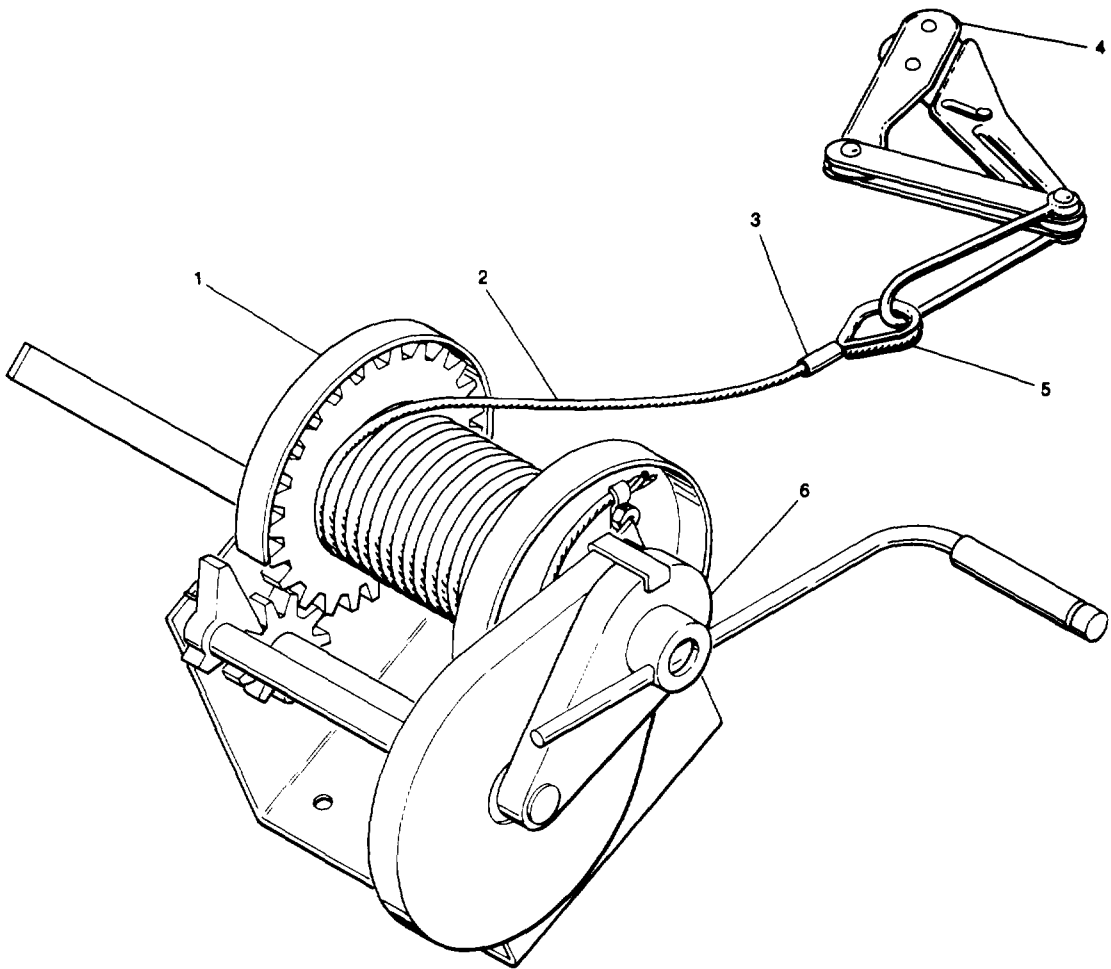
BASE ASSEMBLY, TOWER WINCH
